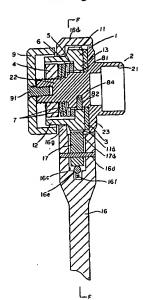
It is a F-F fragmentary sectional view in the 4th example of drawing 16. [Drawing 18] It is partial drawing of longitudinal section of the 5th example in the constant torque band of this invention.
